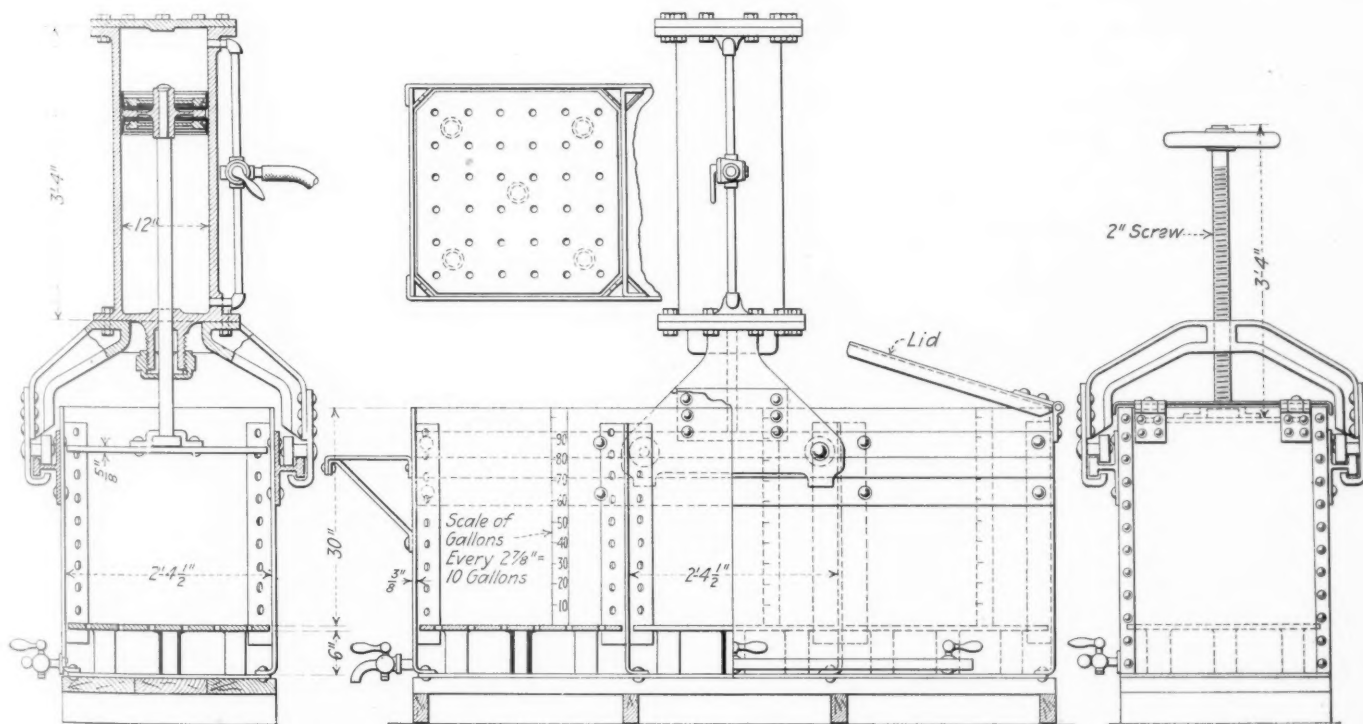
Tanks Equipped with Press for Preparing Journal Box Packing
